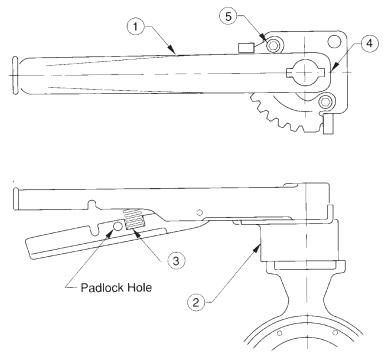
Quarter-turn lever operator. Numbered parts are as follows: (1) lever, (2) rachet plate, (3) spring, (4) set screw, (5) socket head cap screw. (*Courtesy of Flowseal, a unit of the Crane Valve Group*)
